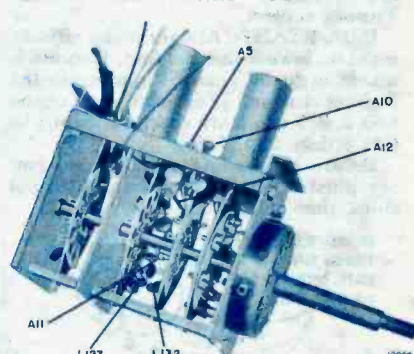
Right Side View of Tuner 94D77-1 Showing Adjustment Locations.
